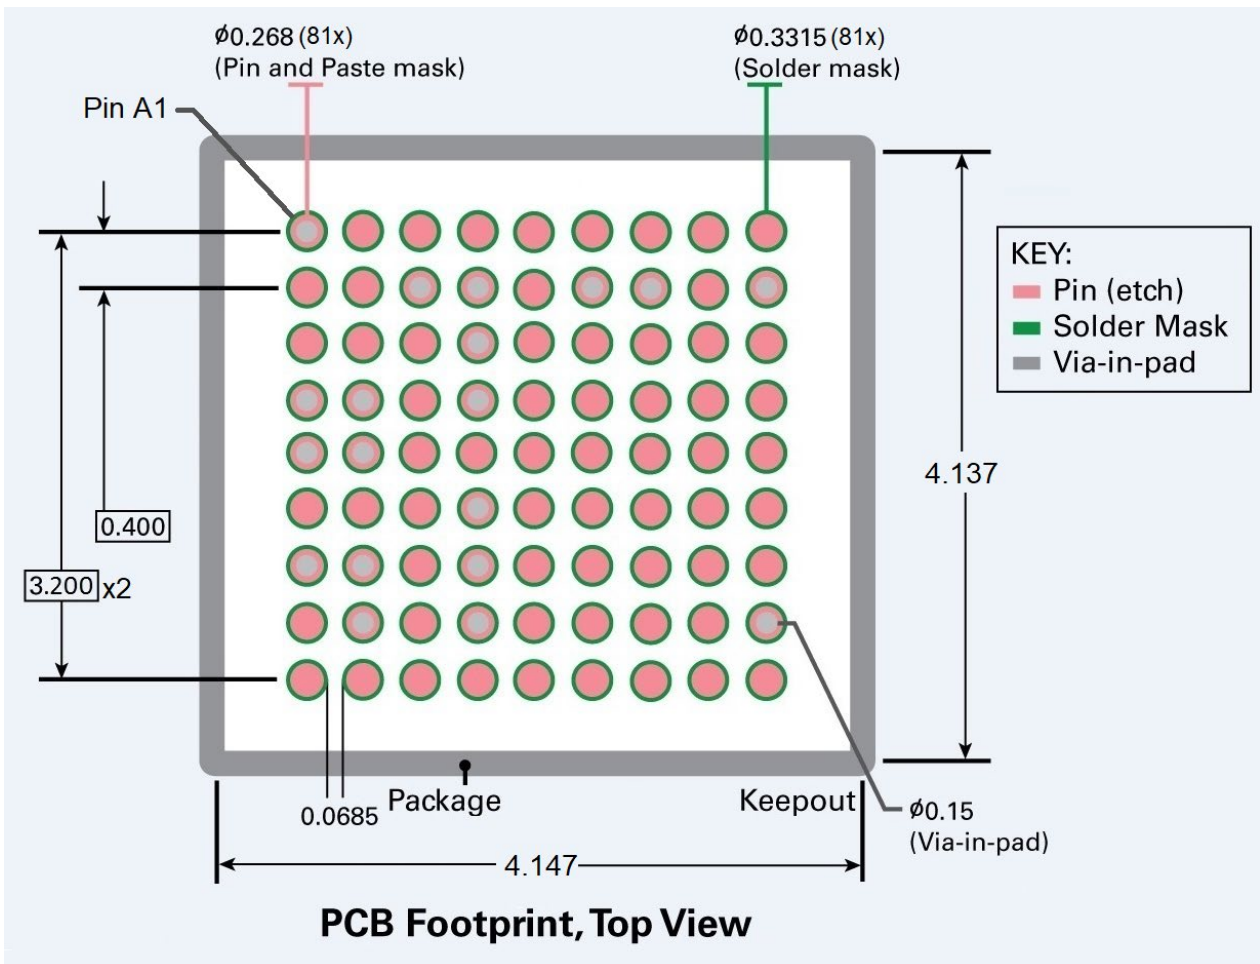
P9412 CSP Recommended PCB Footprint Design Dimensions
